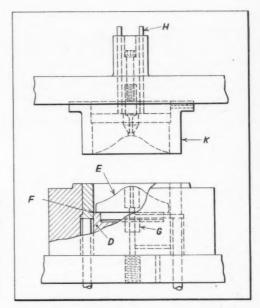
Part-sectional view of the blanking, forming and pinch-trimming tool for the mild steel jar cover A, Fig. 1
